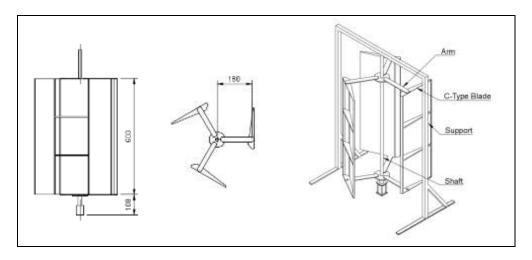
Schematic figure of C-type Darrieus wind turbine.
